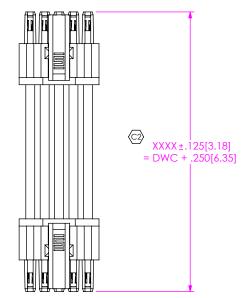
MMSD-05-22-X-XXXX-S SHOWN
